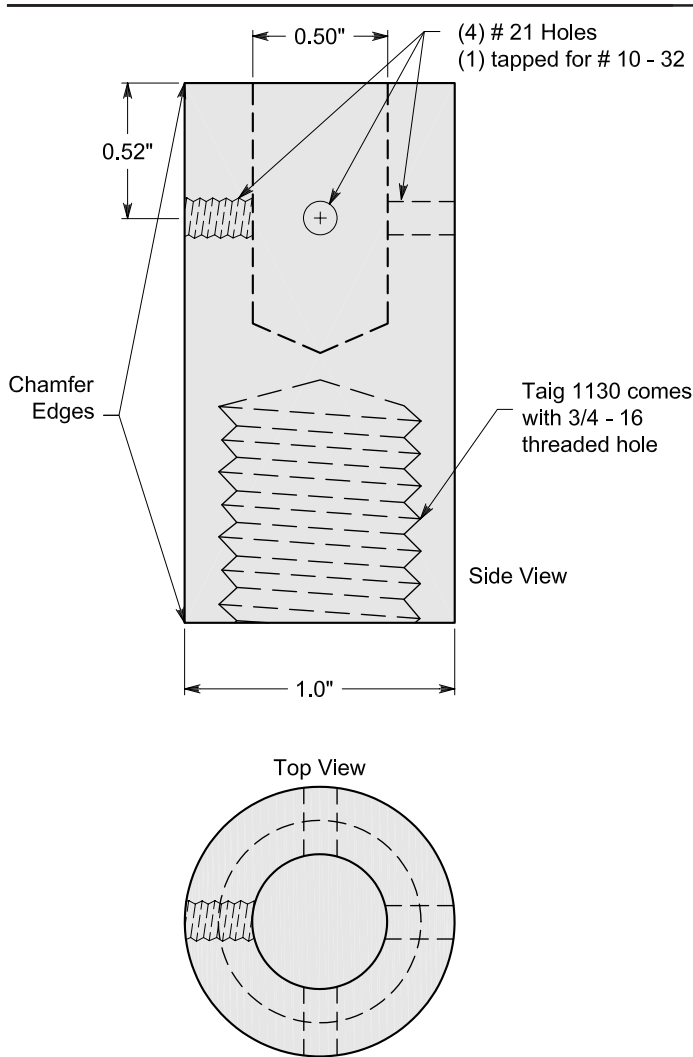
Making a 1/2-inch end-mill holder out of a Taig 1130 blank arbor.
